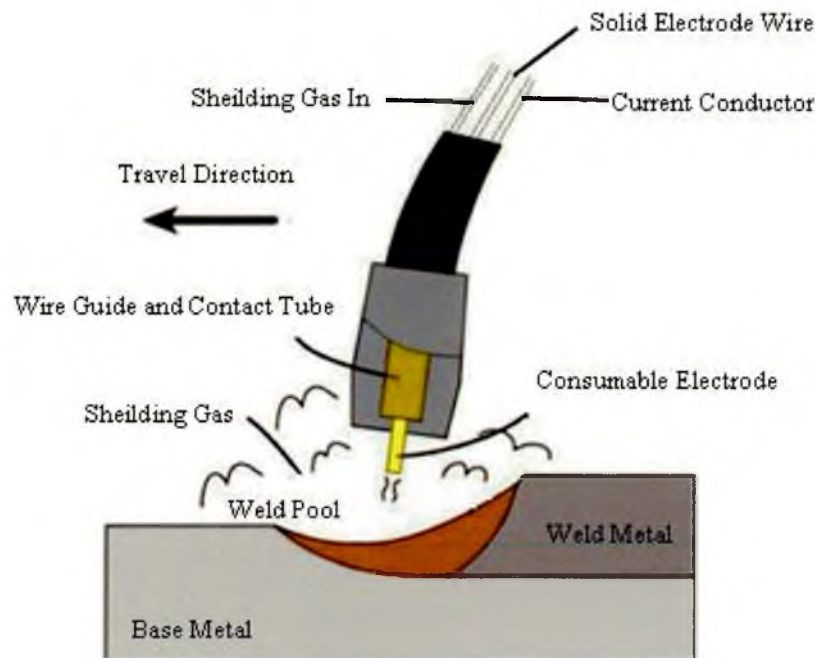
Schematic Diagram of Gas Metal Arc Welding Process
